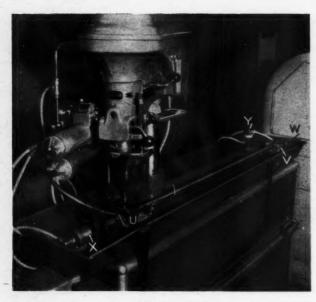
This special-purpose machine, which is tended by a deaf-and-dumb operator, is employed for drilling the cross pin holes in the push rod end fittings, in a floor-to-floor time of 30 sec. each
